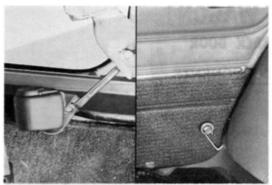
Removing Seat Belt Retractor and Seat Back
